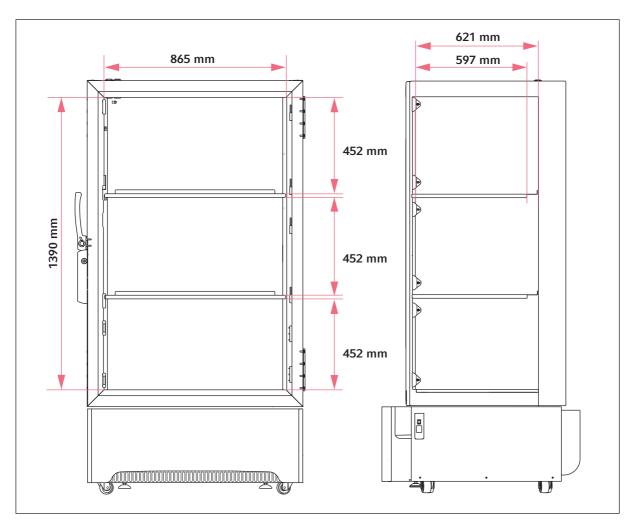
Internal dimensions for devices with 3 inner compartments
